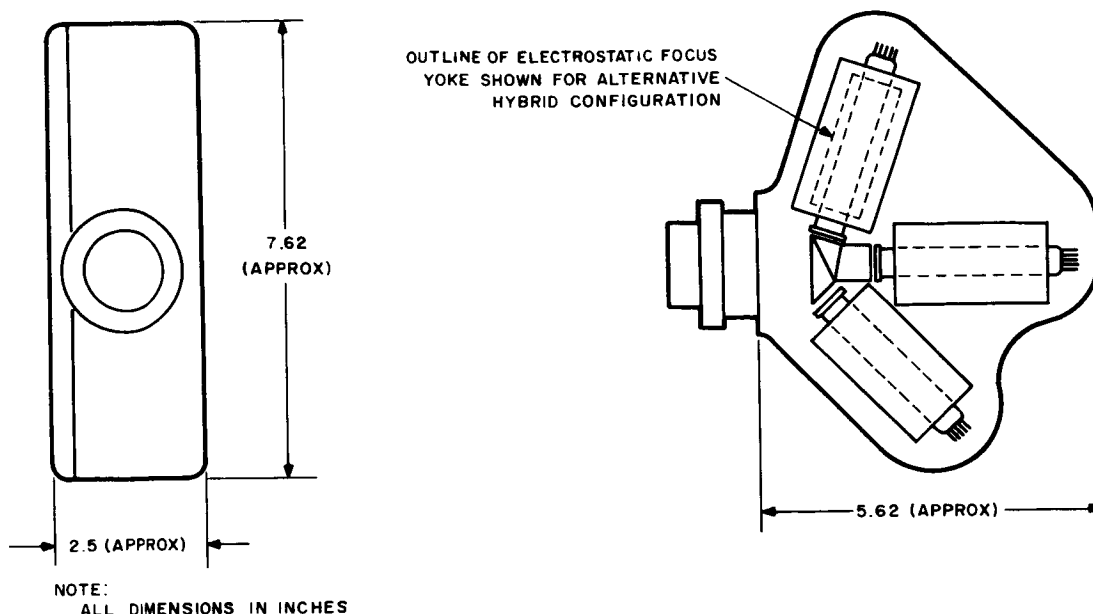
Package Outline for Camera Head Using Three All-Magnetic 1/2-Inch Vidicon Tubes
